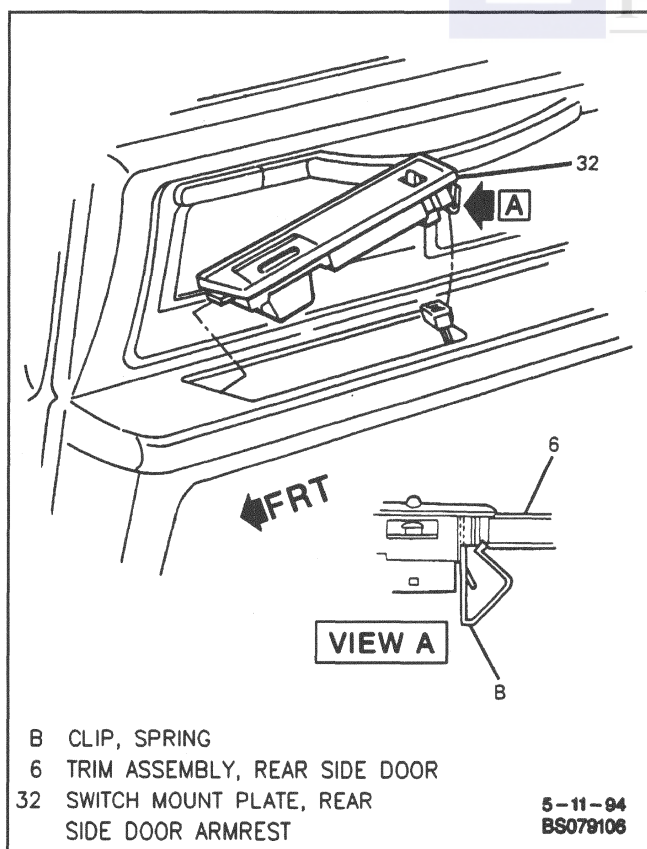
Removing Rear Side Door Armrest Switch Mounted Plate-(Buick)
